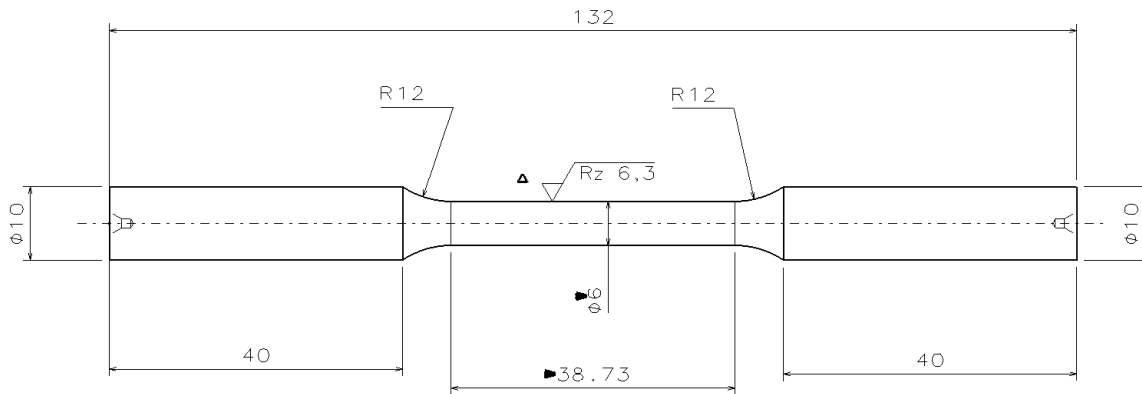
Tensile test piece "A 6 × 30" per DIN EN ISO 6892-1
